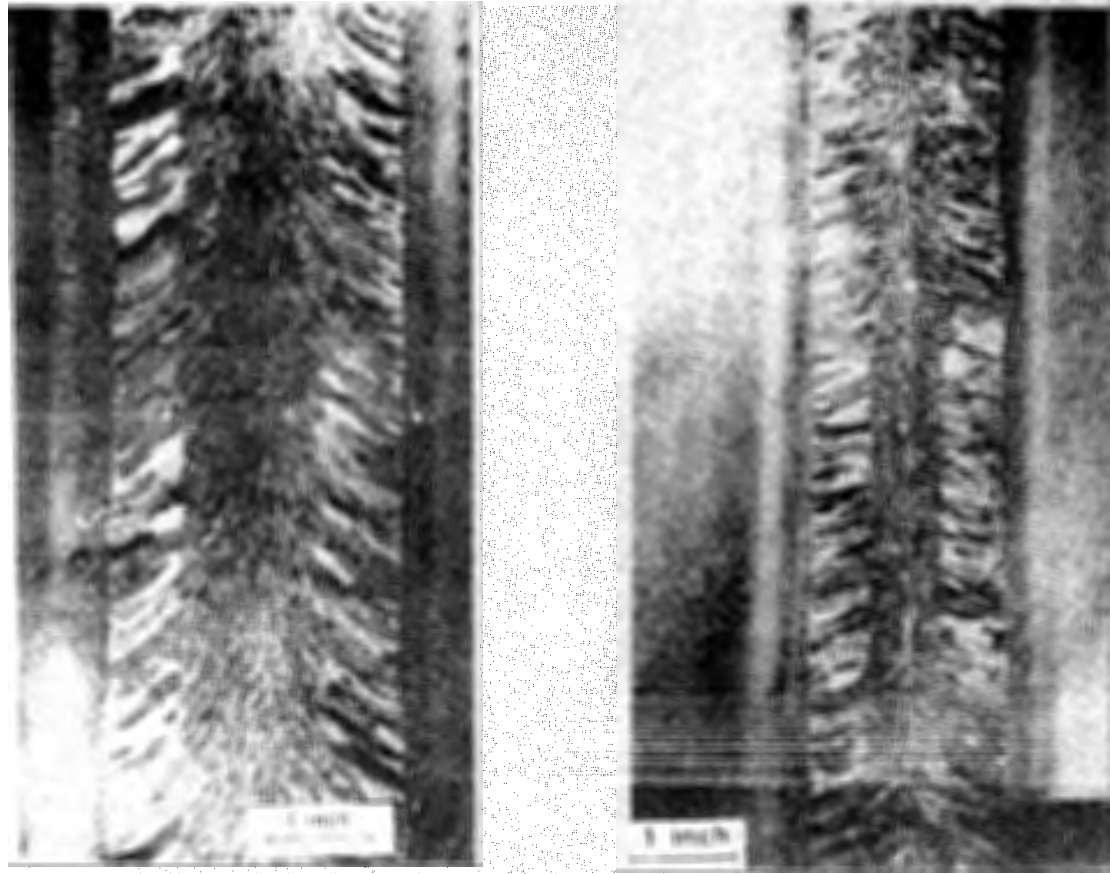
Typical weld metal macrostructures in standard and narrow gap welds. (Micrograph.)
